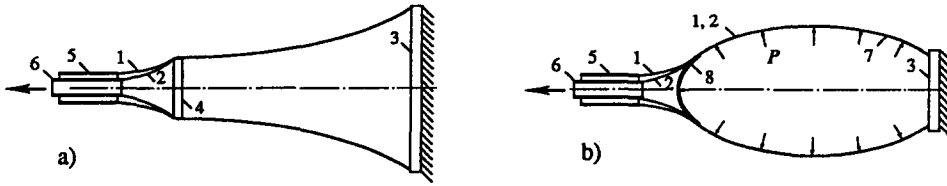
Nested sleeve assembly: (a) under axial tension; (b) under axial tension and a distributed surface load.
